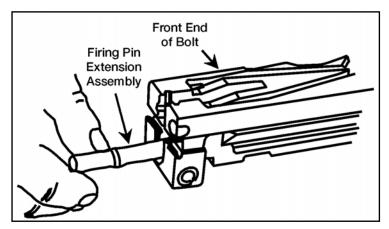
Removal of the firing pin extension assembly
